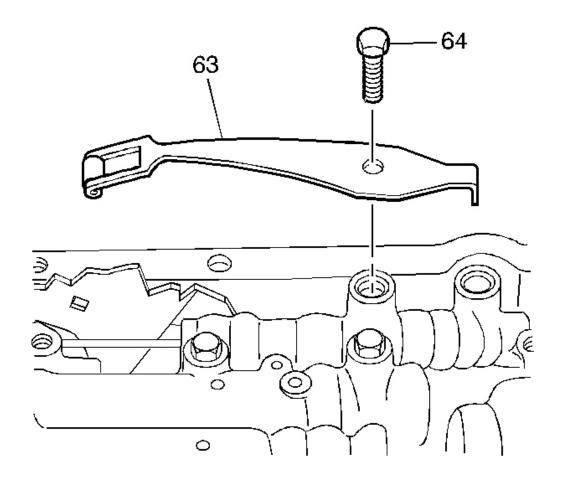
View Of Manual Detent Spring Assembly Courtesy of GENERAL MOTORS CORP.
